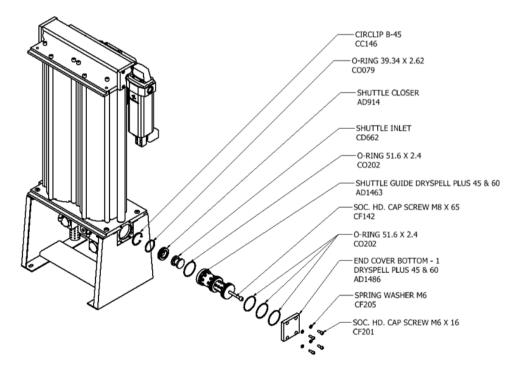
Exploded view of bottom shuttle-Dryspell Plus models 45 and 60
